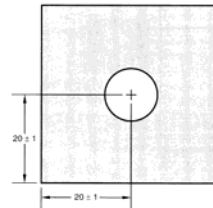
A square block with a hole drilled in the center, using conventional tolerancing.
